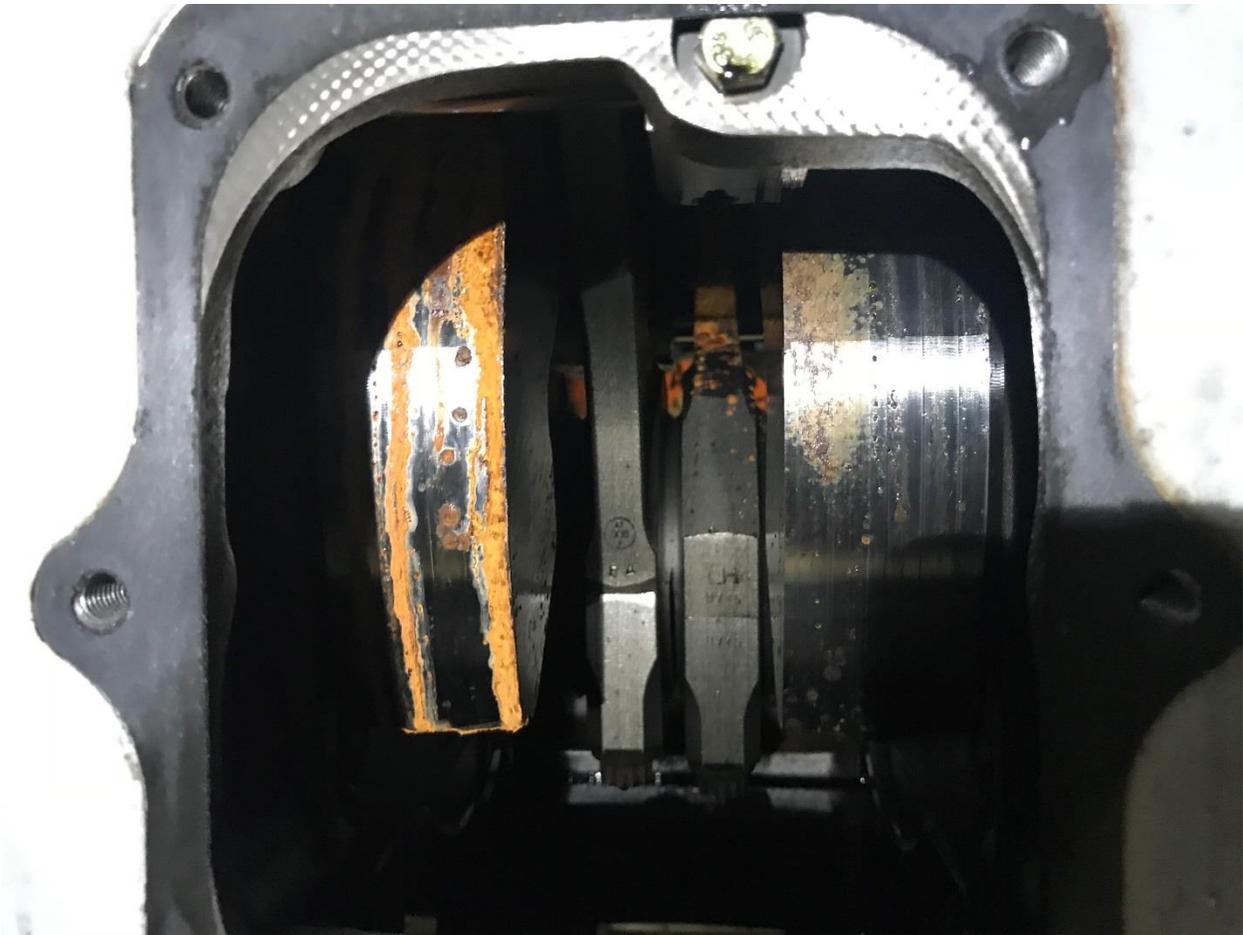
Typical Surface Corrosion Observed on Crank Shaft.
